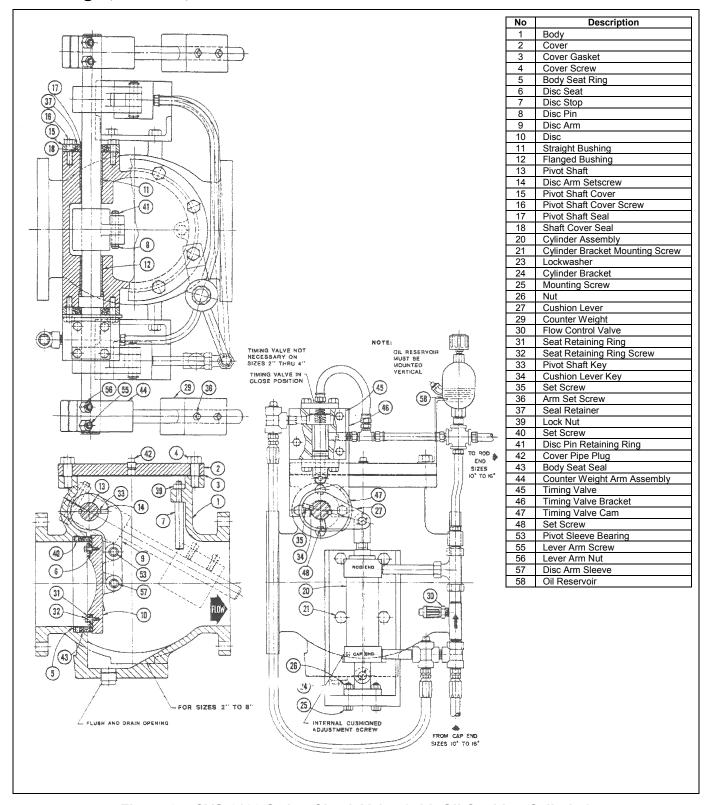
CVS-6100 Swing Check Valve (with Oil Cushion Cylinder)
